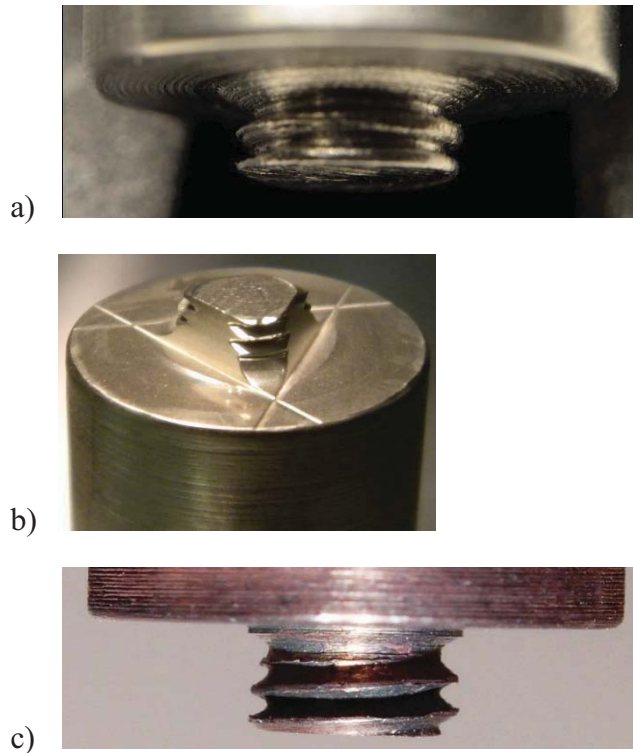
Tool geometries studied for friction stir processing of Al 5059, (a) grooved pin (concentric threads with no helix), (b) 3-flat threaded pin, and (c) conventional threaded pin.
